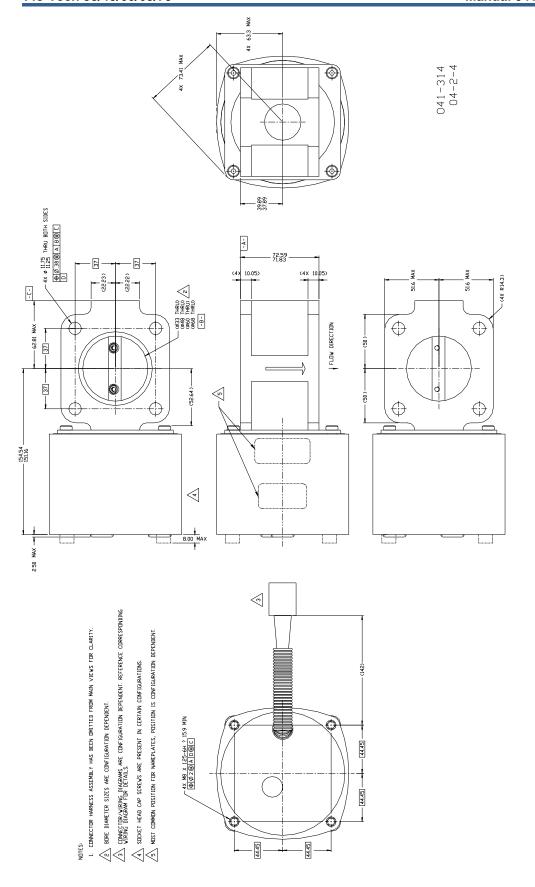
Flo-Tech Outline Drawing (M10 Flange Mounting)
